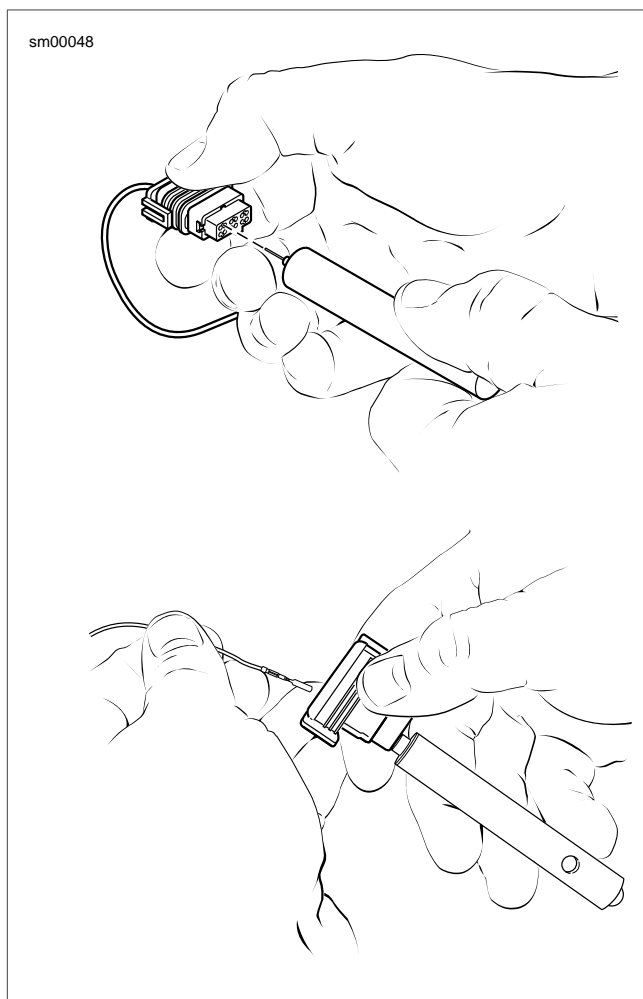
Packard Micro 64 Connector: Insert Tool and Remove Terminal
